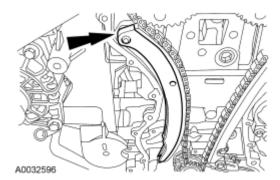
Locating RH Timing Chain Guide Courtesy of FORD MOTOR CO.
